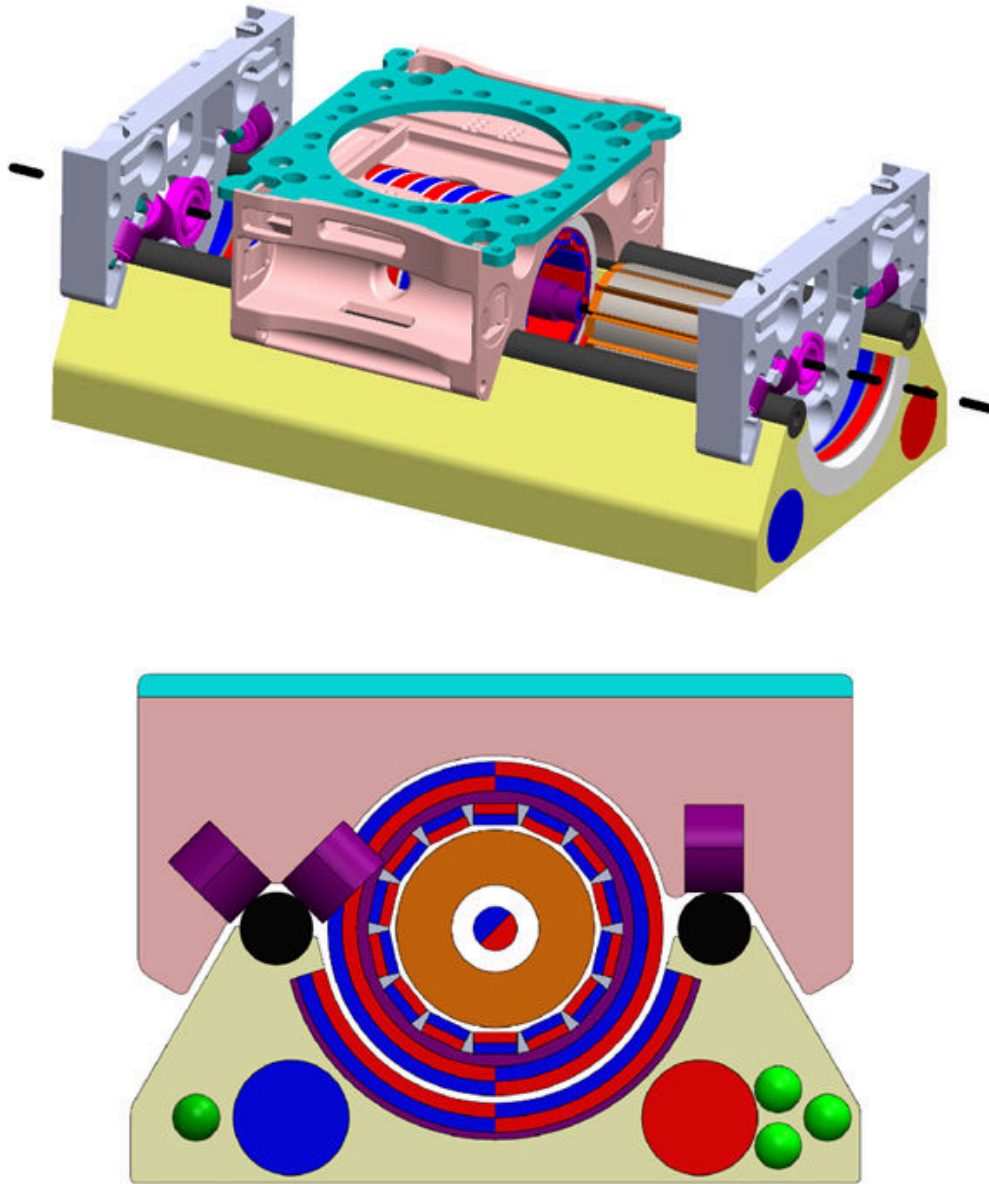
This figure illustrates the assembly of the cart module and track segment with an exploded-view (top) and a cross-sectional view (bottom). The core spinning element, the *spindle*, is shown in the center, which is supported by two ball bearings *pink* along the main axis of rotation *dotted line* which are pressed into two machined aluminum side plates *gray*. The two alternating helical magnet arrays *red* and *blue* on the exterior of the spindle interface with matching helices on the track in order to translate the rotation of the spindle into linear motion. A brushless motor (Turnigy Multistar 2834) with custom high torque-constant windings is the shown in *orange and gray* in the center. Six *purple* wheels provide a sliding constraint between the track and cart. The electronics (not shown) are mounted in a spacer *light red*, which holds the modular connector in, which is shown in *teal*.
